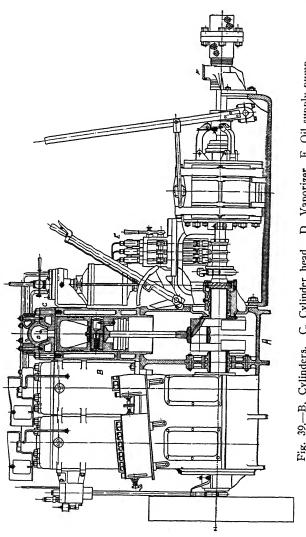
B. Cylinders, C. Cylinder head. D. Vaporizer. E. Oil supply pump.
